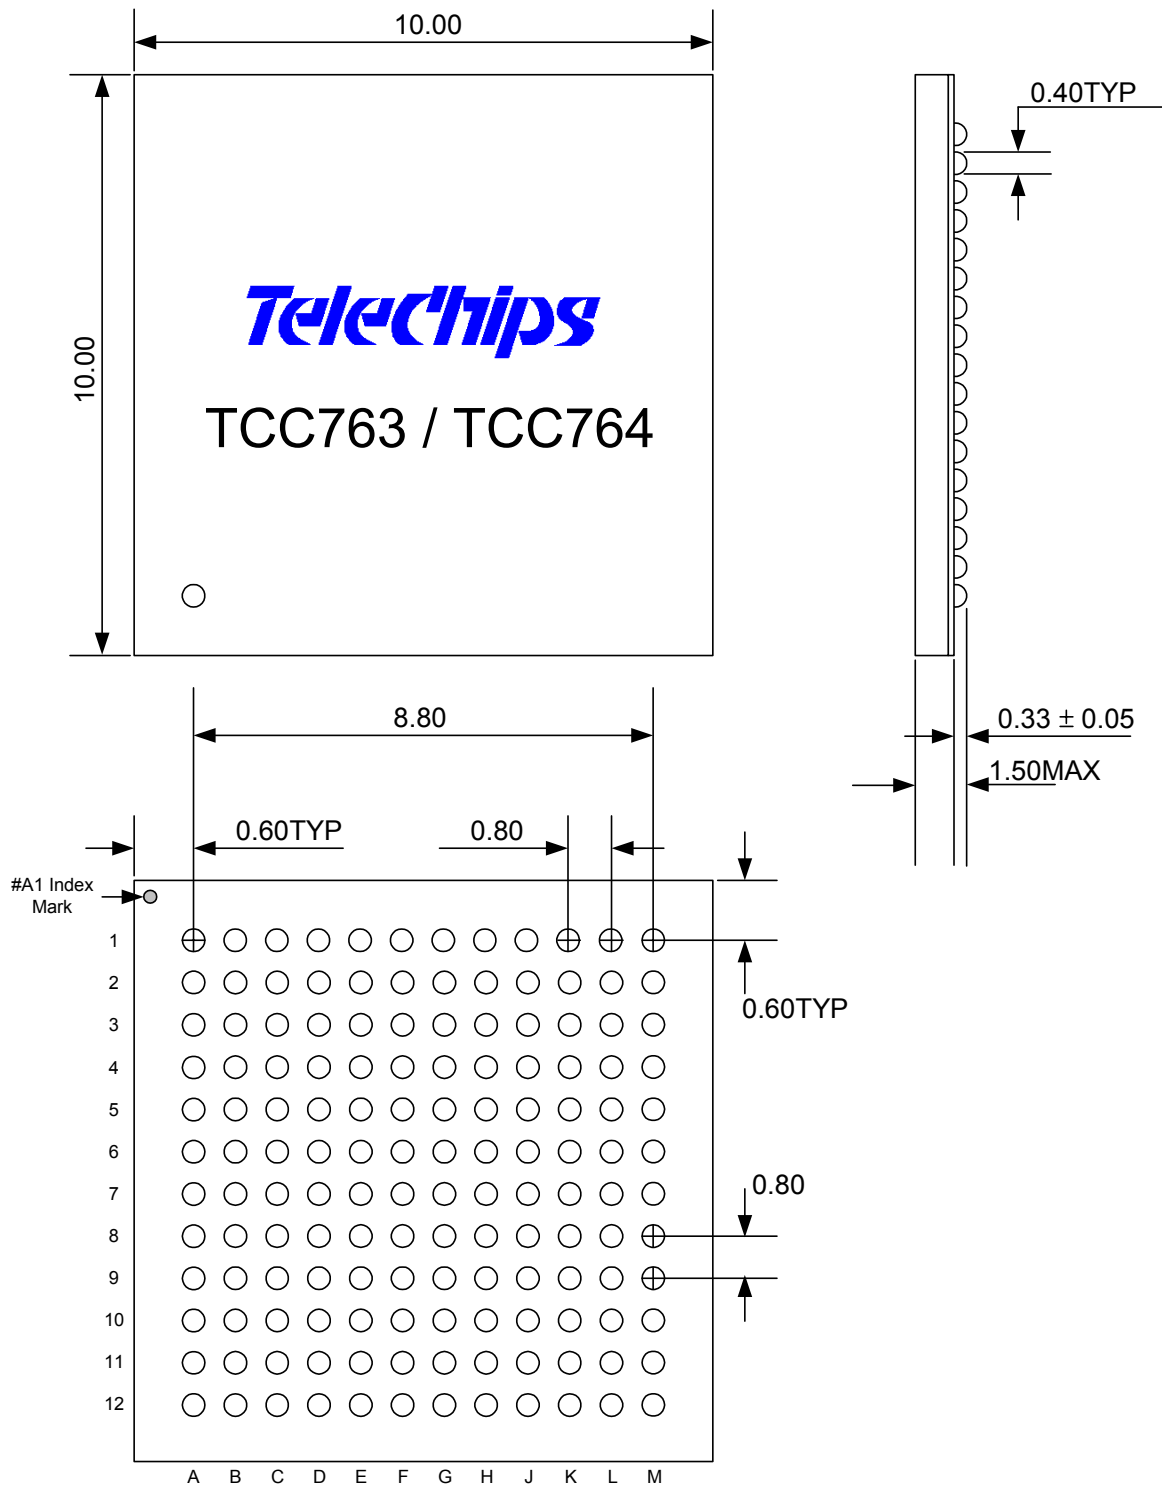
TCC763 / TCC764 Package Dimension (144-FPBGA-1010)
